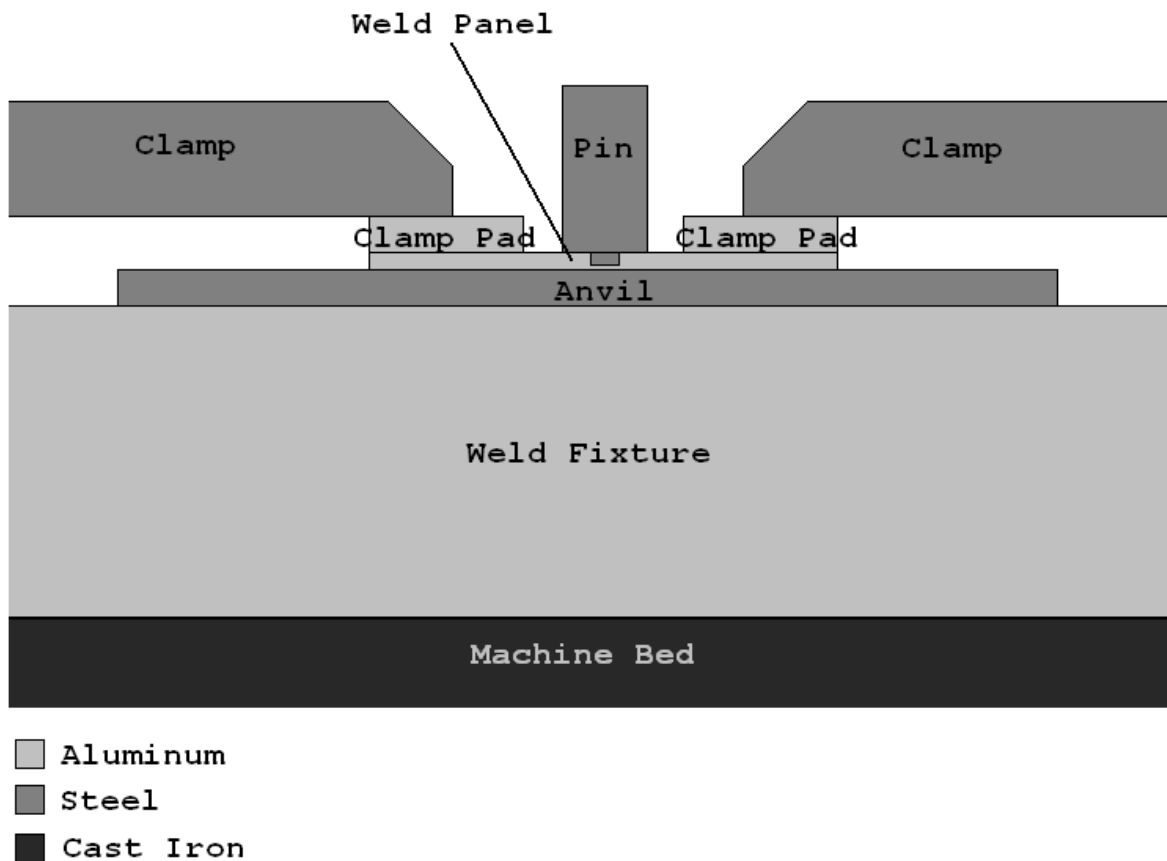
End view (in weld direction) of tooling
